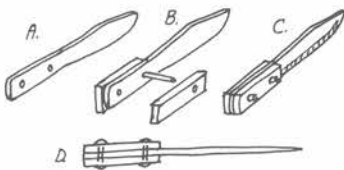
Fabrication of the boat knives (two required). A metal blank (A) is shaped and bored, then fitted with its handle slabs (B), which are riveted in place (C, D).
